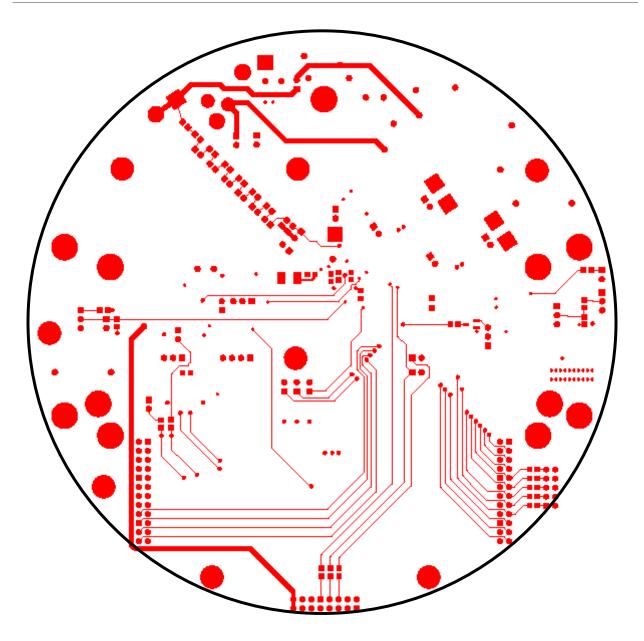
71M6511 4-Layer Demo Board: Bottom Signal Layer
